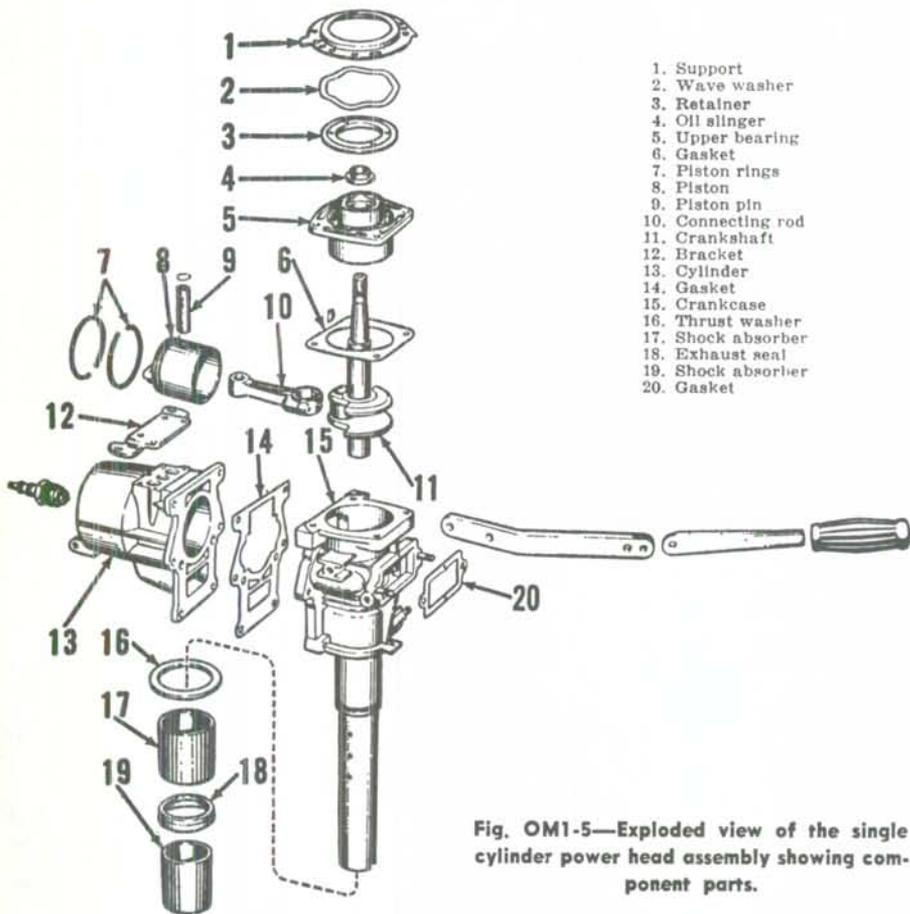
Exploded view of the single cylinder power head assembly showing component parts.
